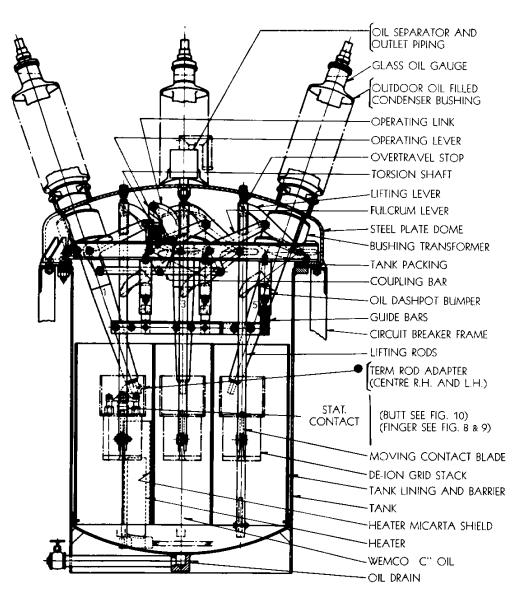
800 Amp., 69,000 Volt, Type BPO-B Breaker, Bushings and Contacts-Sectional View
